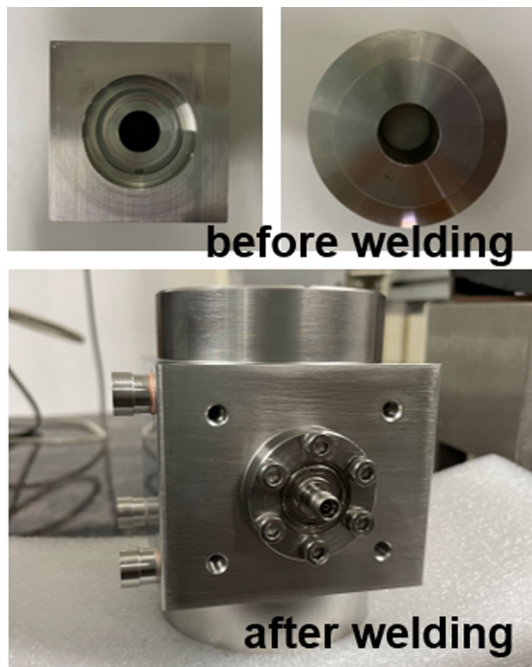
BAM prototype: two parts of the pickup body and the assembly after welding.
